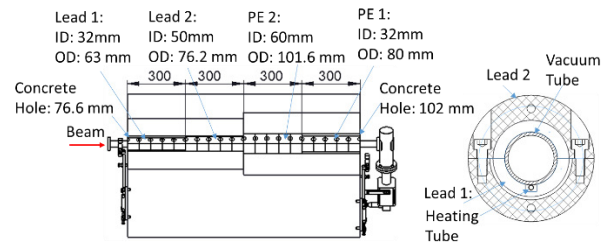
Radiation Shielding Blocks composed of 40 half circle shaped blocks and installed in the concrete wall.
